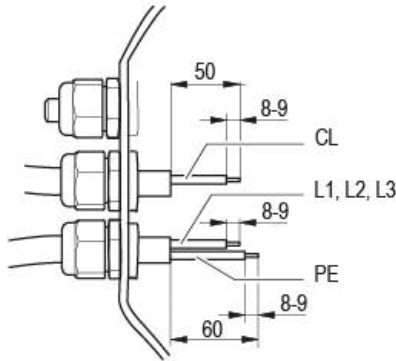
Recommended stripped lengths in mm (inside terminal box)
